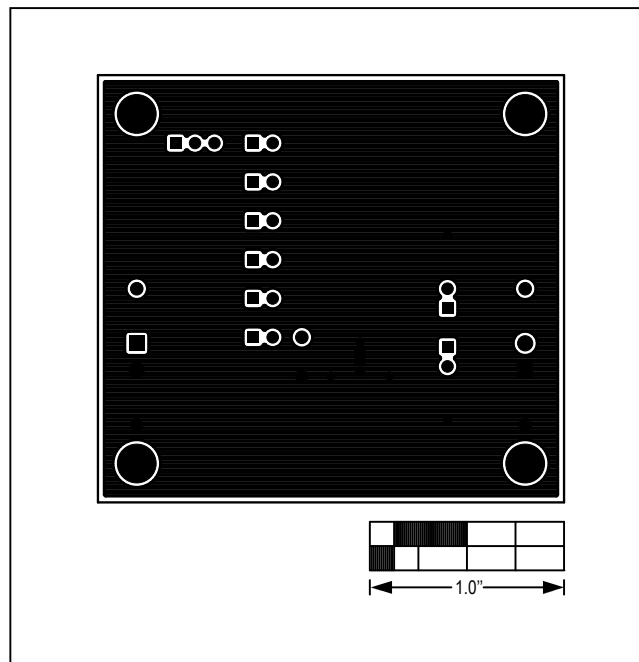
MAX14626 EV Kit PCB Layout—Solder Side
